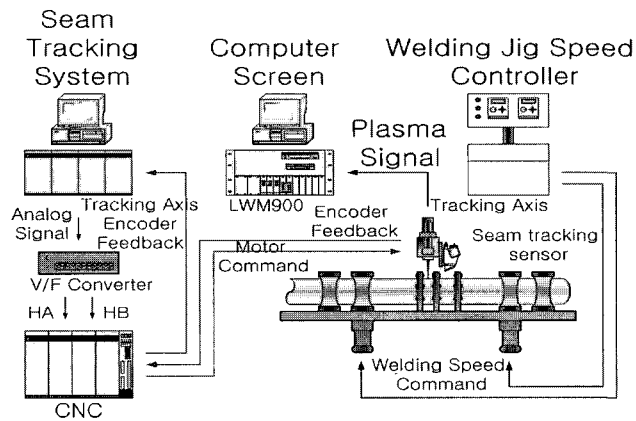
Interfacing and control system for laser welding of tube
